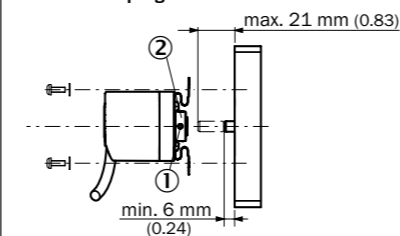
Installing the DBS36 blind hollow shaft with stator coupling
